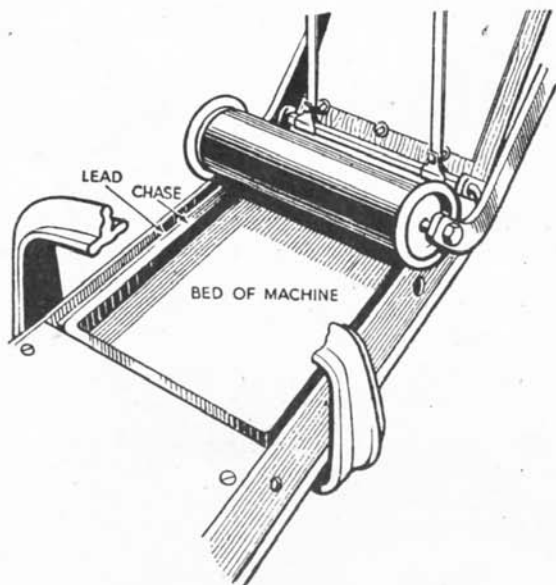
Chase in machine with piece of lead between side of chase and side of machine.
